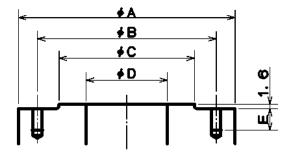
Dimensions of the Joint (Compressor) for the ANSI #300 Flange
